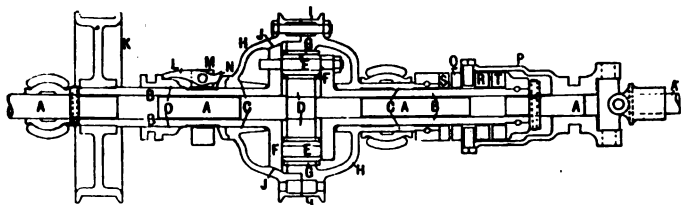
SECTION OF THE EAGLE CHANGE-SPEED GEAR AND DRIVING SHAFT.
